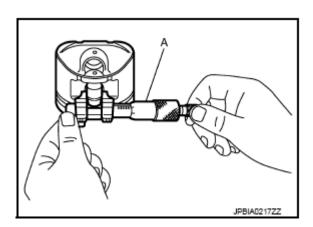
Measuring Inner Diameter Of Piston Pin Hole Using Inside Micrometer Courtesy of NISSAN NORTH AMERICA, INC.
